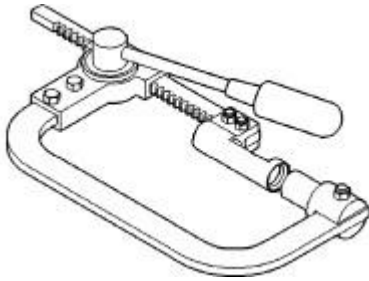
COMPRESSOR, VALVE SPRING - C-3422-D
